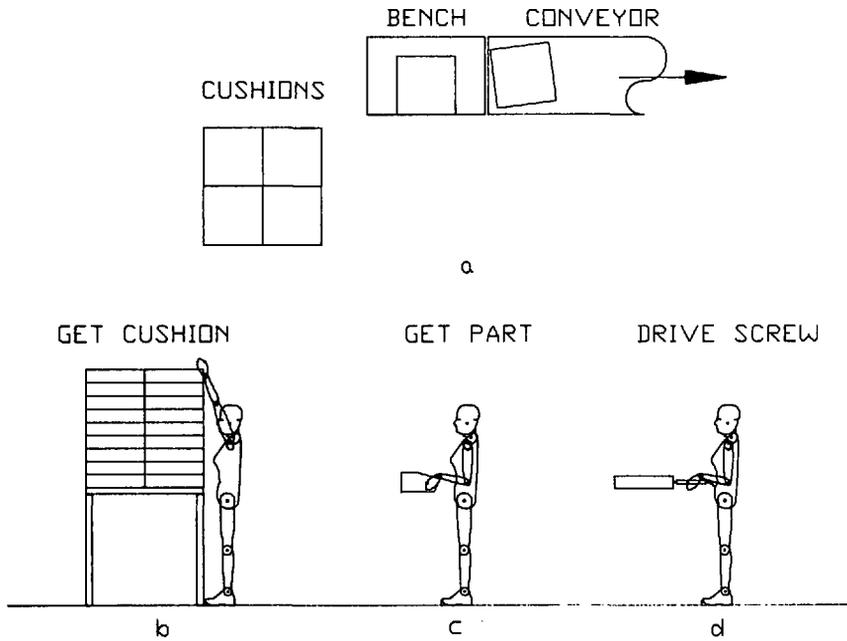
Workstation layout for attaching bracket to cushion is shown in a. The worker gets a cushion, b, gets bracket and screw, c, drives screw, d, and puts cushion and bracket assembly on the conveyor, a.
